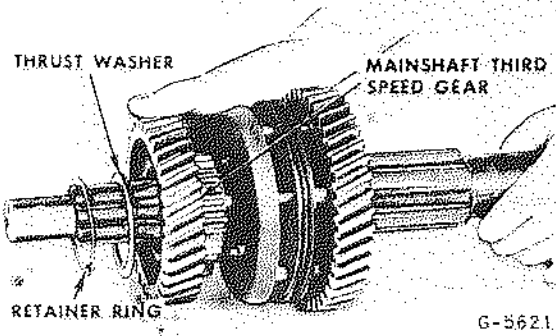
Removing Mainshaft Fourth Speed Gear
